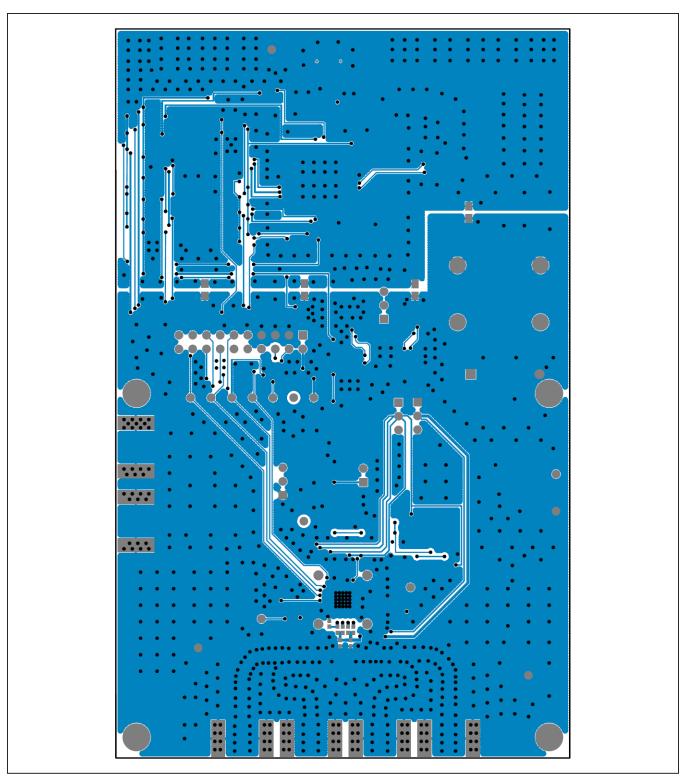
MAX2870/MAX2871 EV Kit PCB Layout—Bottom Layer
